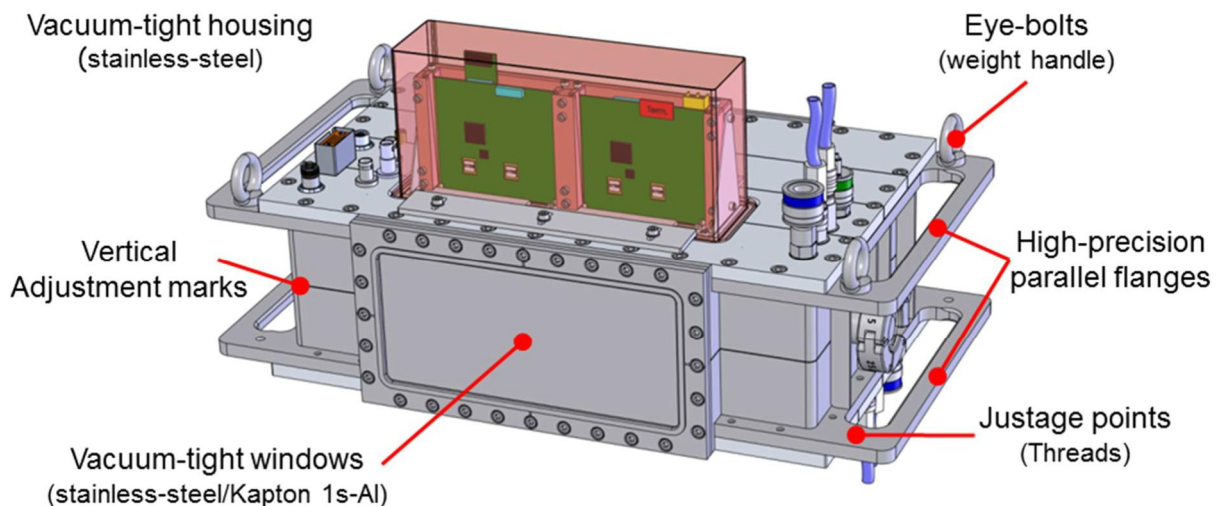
CADs sketch of the chamber housing emphasizing various design details which support the adjustment during mounting.
